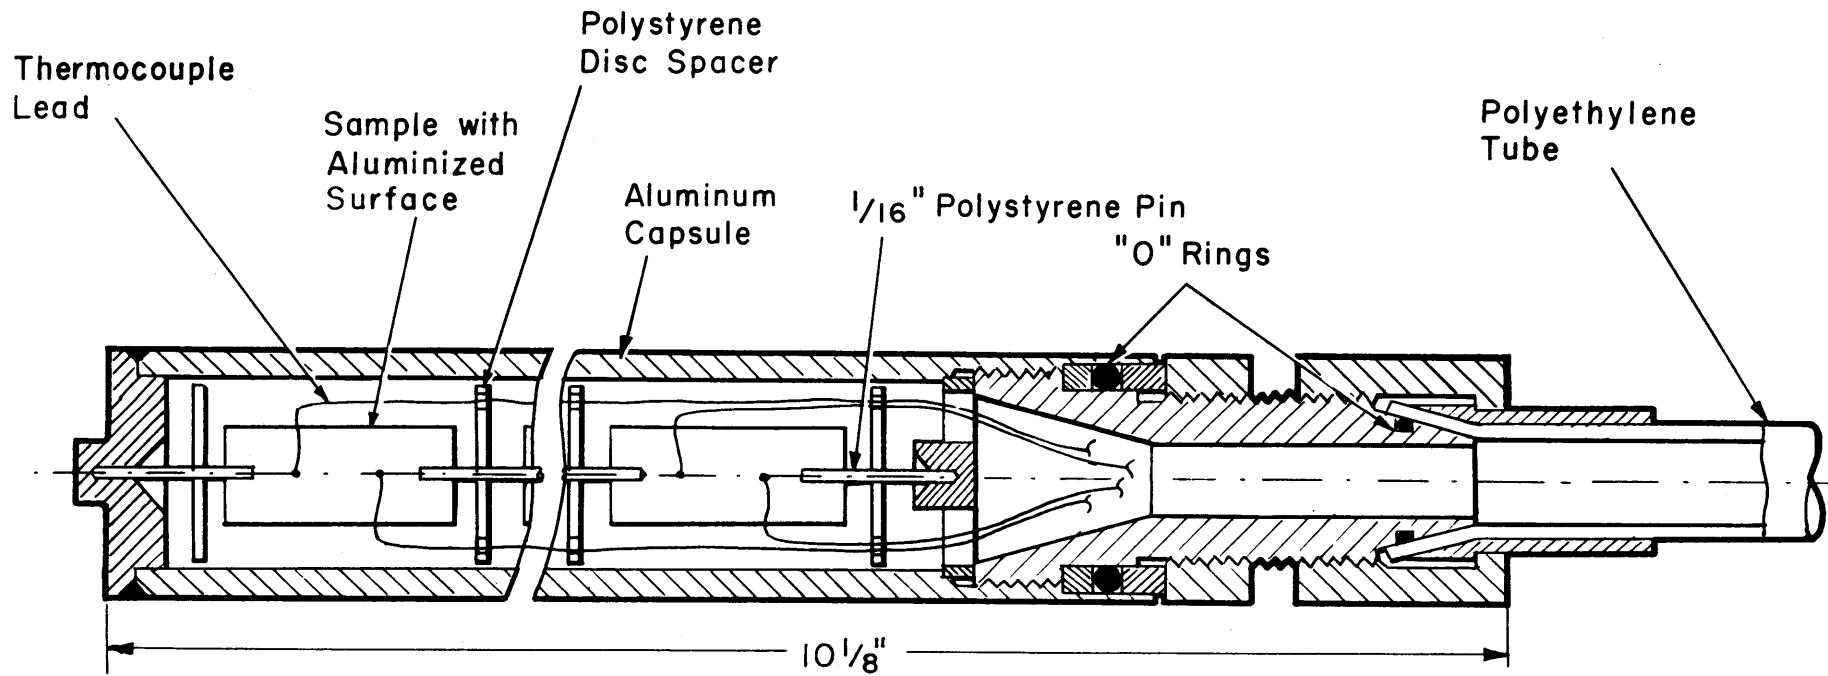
ASSEMBLY DRAWING OF CALORIMETER II
